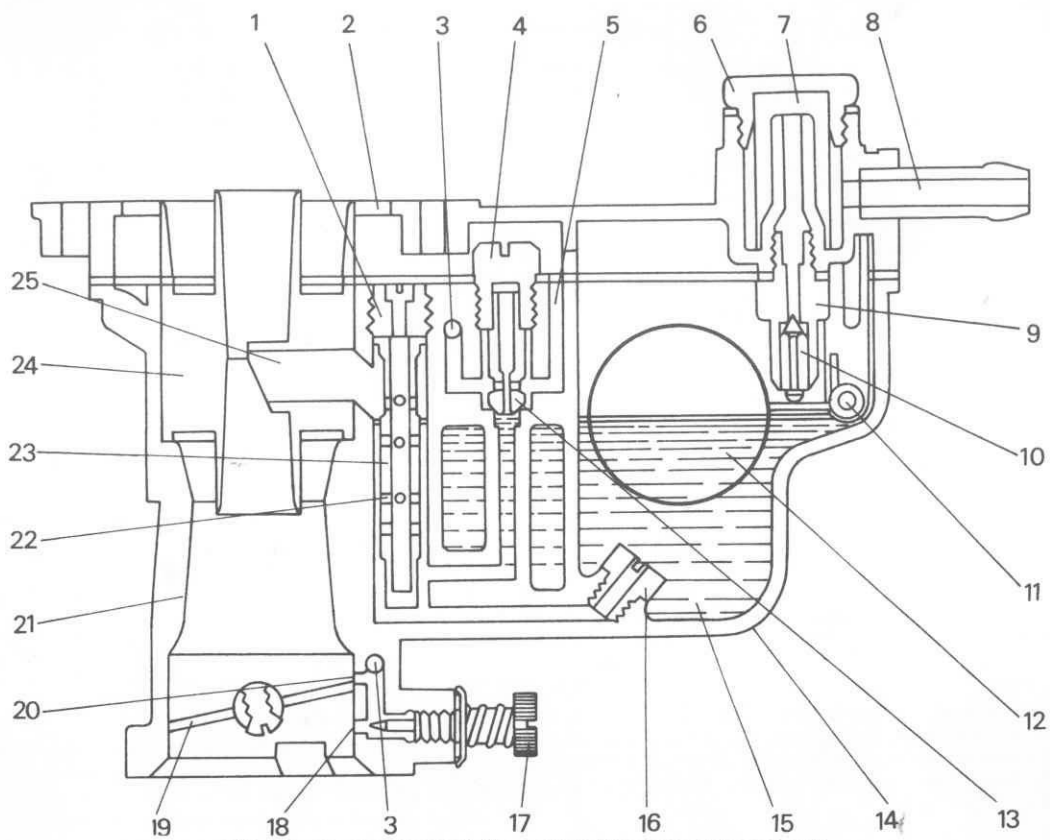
4 Section through the carburettor, type Weber 28 IMB
